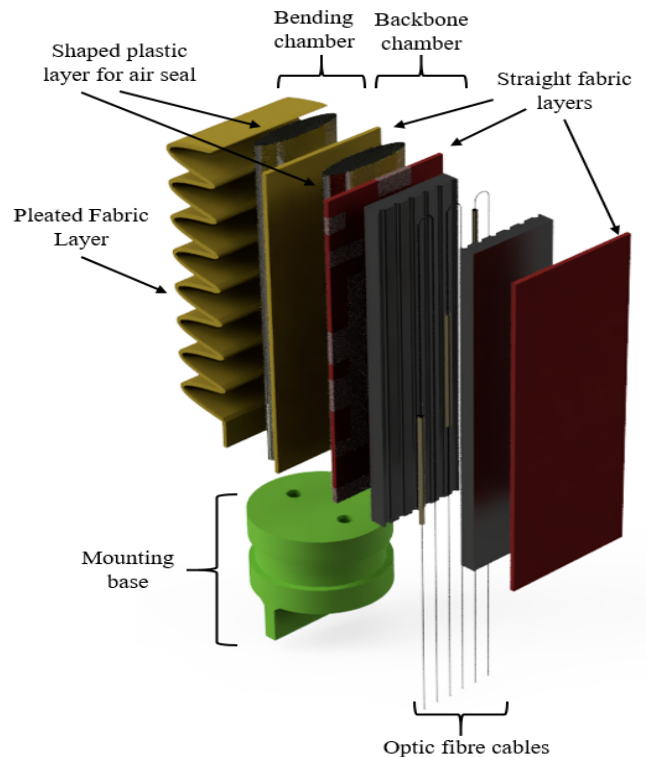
Exploded view for soft fabric-based pneumatic actuator (SFPA) assembly showing actuator structure and optic fibre cables connected to waveguides.
